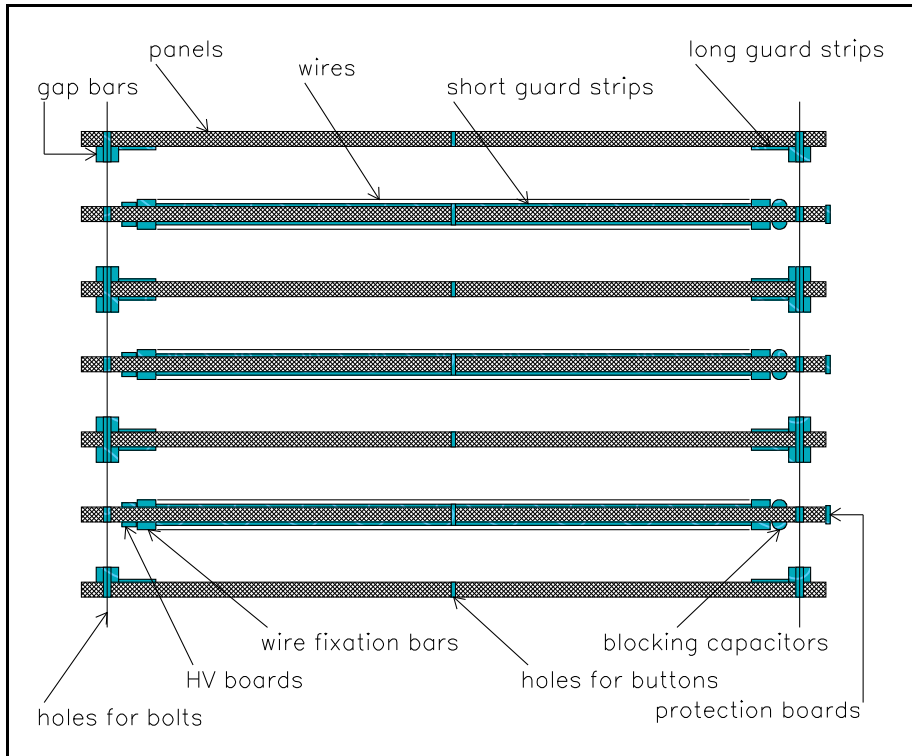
Exploded view of a cathode strip chamber (not to scale) showing its main components and the way the chamber is assembled.
